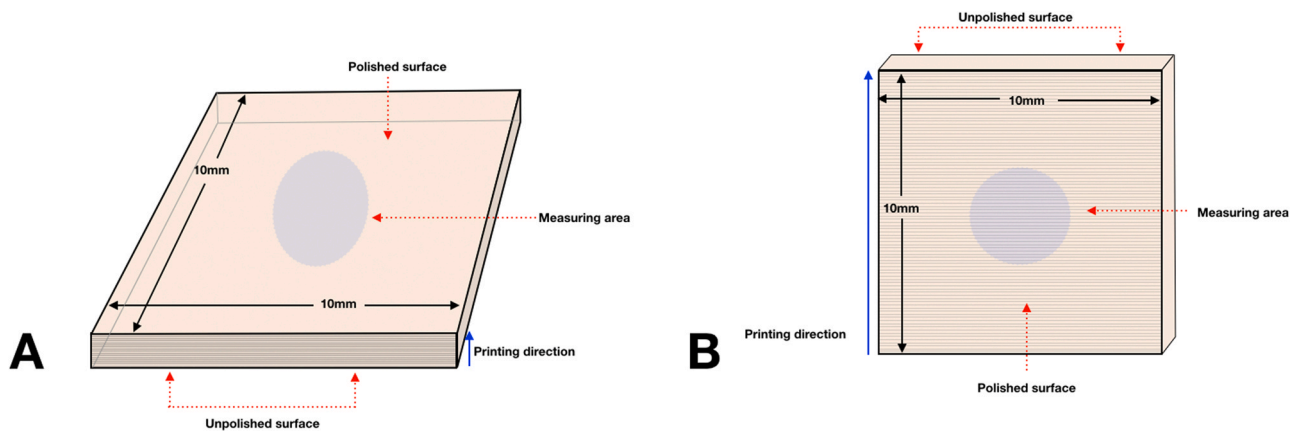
A- Specimen size, printing orientation (0° or horizontal printing) and polished surface. B- Specimen size, printing orientation (90° or vertical printing) and polished surface.
